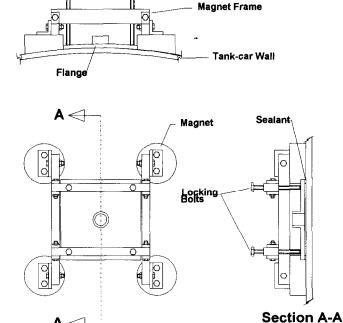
Concept design for a drilling flange incorporating stock magnets.
